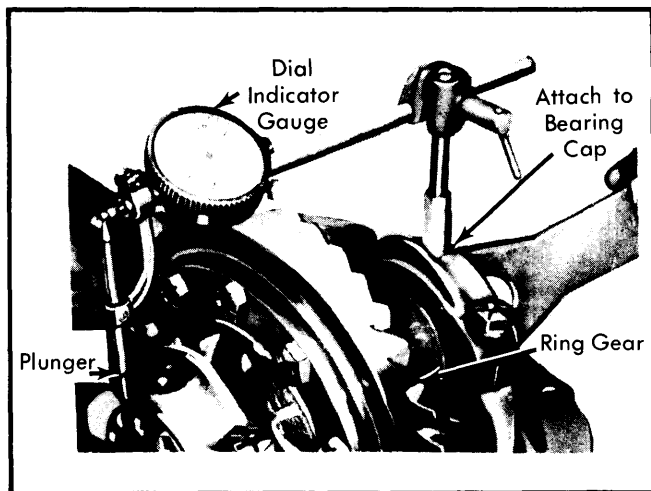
Dial Indicator Installed to Check Case Spread for Preload
